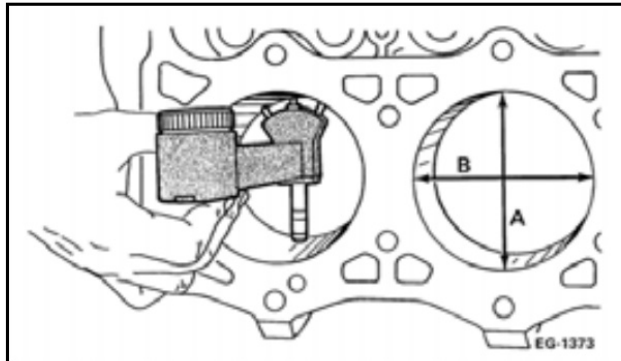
Checking the Cylinder Bore for Out-Of-Round
